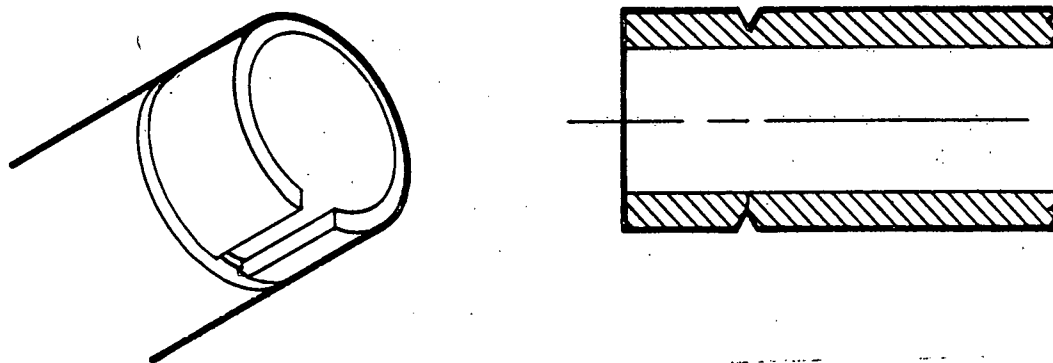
Utilize Groove to Minimize Milling Rollover Burr⁵⁶
